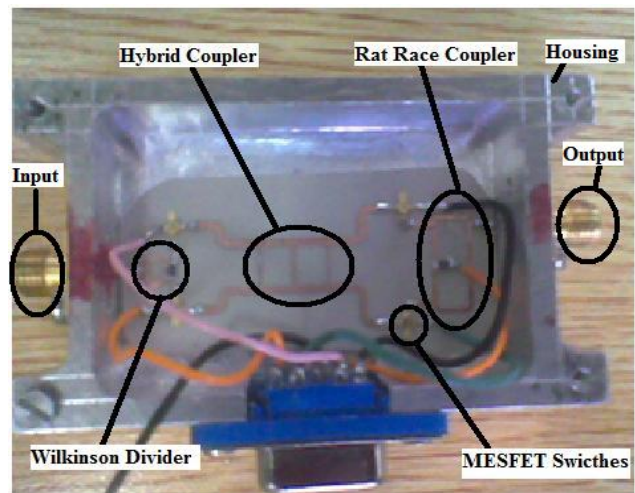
Fabricated Modulator on Arlon's AD 450 PCB
